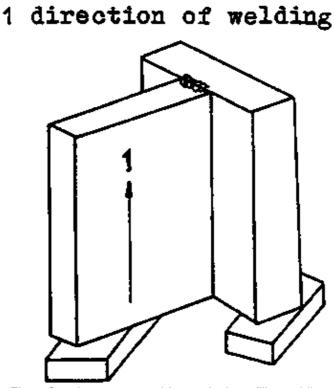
Specimen arranged for vertical-up fillet welding
